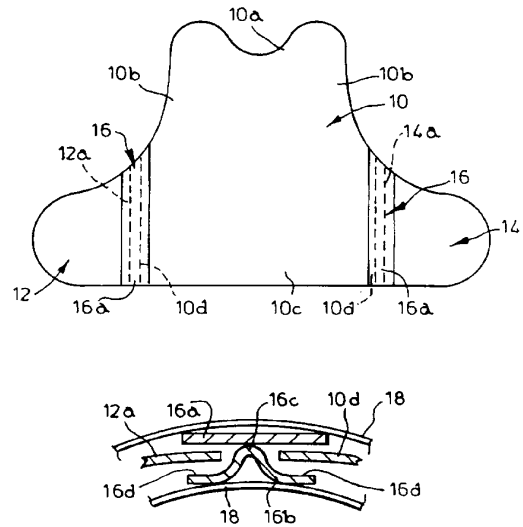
Plate armour design using multi-layer protection over hinges at plate edges [14].
